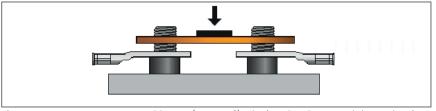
HV BM 1.2+S, power cable HV- (≤35 mm²), placing the shunt module on the ring terminals
